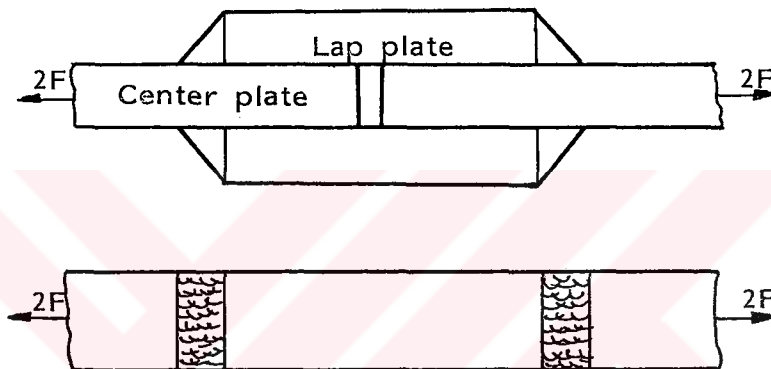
The general arrangement of the transverse fillet weld joint investigated
